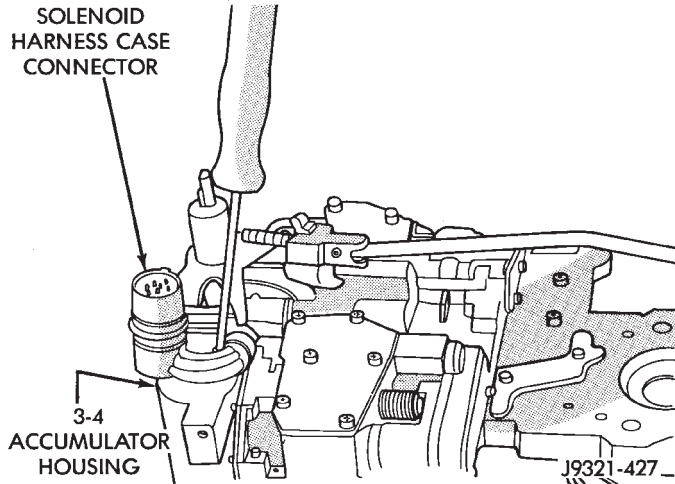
Solenoid Harness Case Connector Shoulder Bolt
